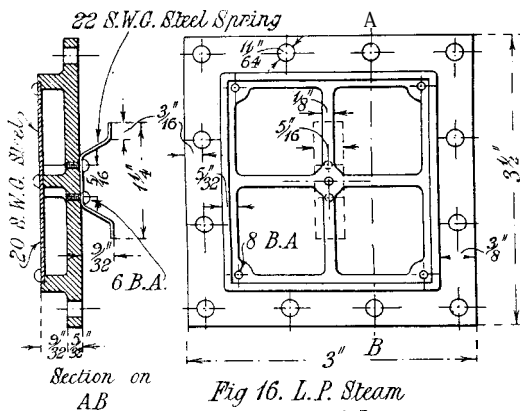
shows the L.P. steam chest cover. It is made of cast-iron. If possible the lip or recess in the back of the casting into which fits the lagging
